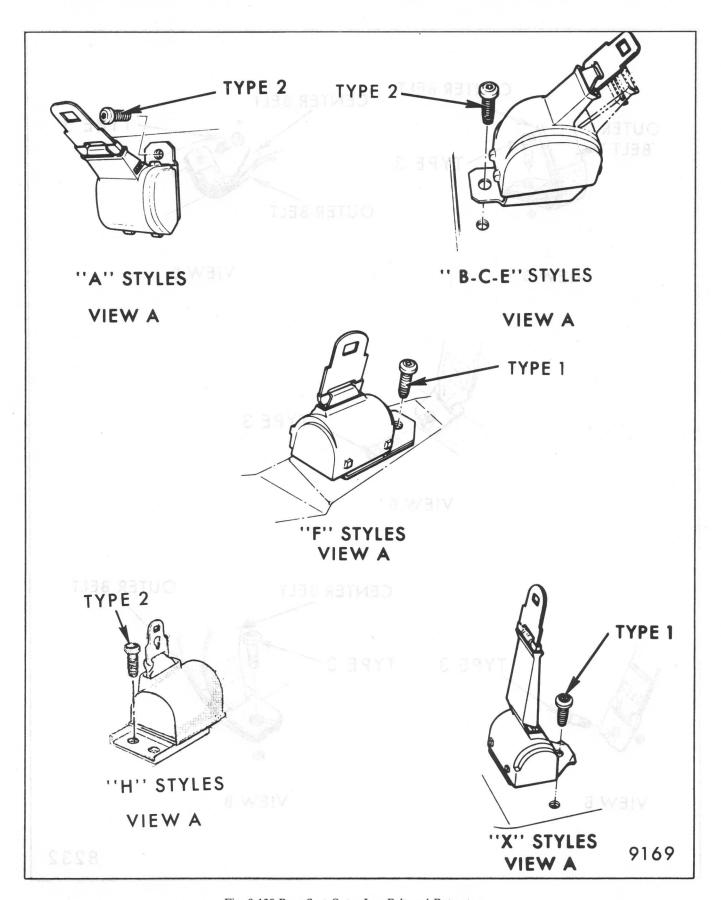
Rear Seat Outer Lap Belt and Retractors
